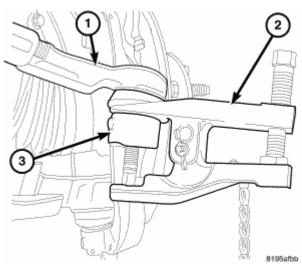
Identifying Outer Tie Rod End & Nut Courtesy of CHRYSLER LLC
